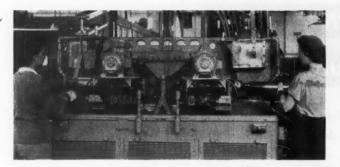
Hardening 106 MM Shell Cases after Forming. Equipment Includes Two Stations. The Process is Automatic except for Loading the Shell Cases into the Machine. Progressive Hardening is Accomplished During Ejection of the Case
